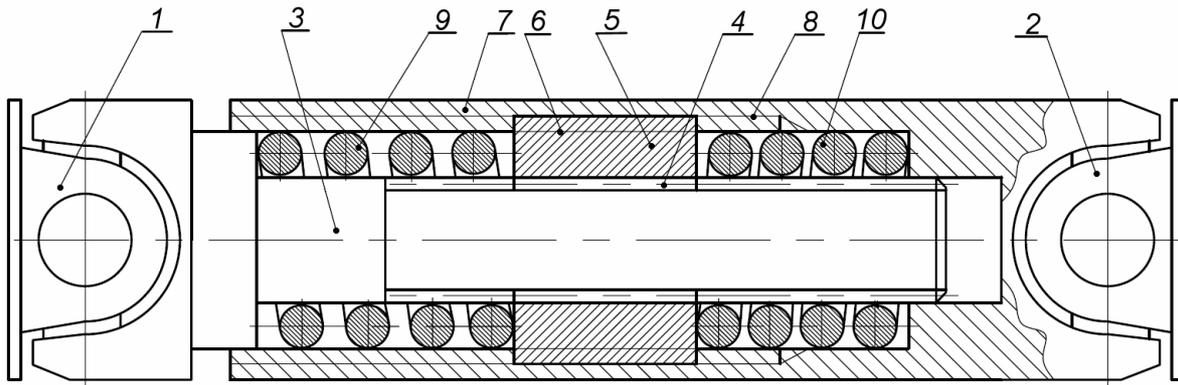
The example of constructional solution of the jointed flexible torsional shaft, where: 1, 2 – Cardan joints, 3 – shaft, 4 – splined connection, 5 – sleeve, 6 – screw thread mechanism, 7 – casing, 8 – internal thread, 9, 10 – screw springs
